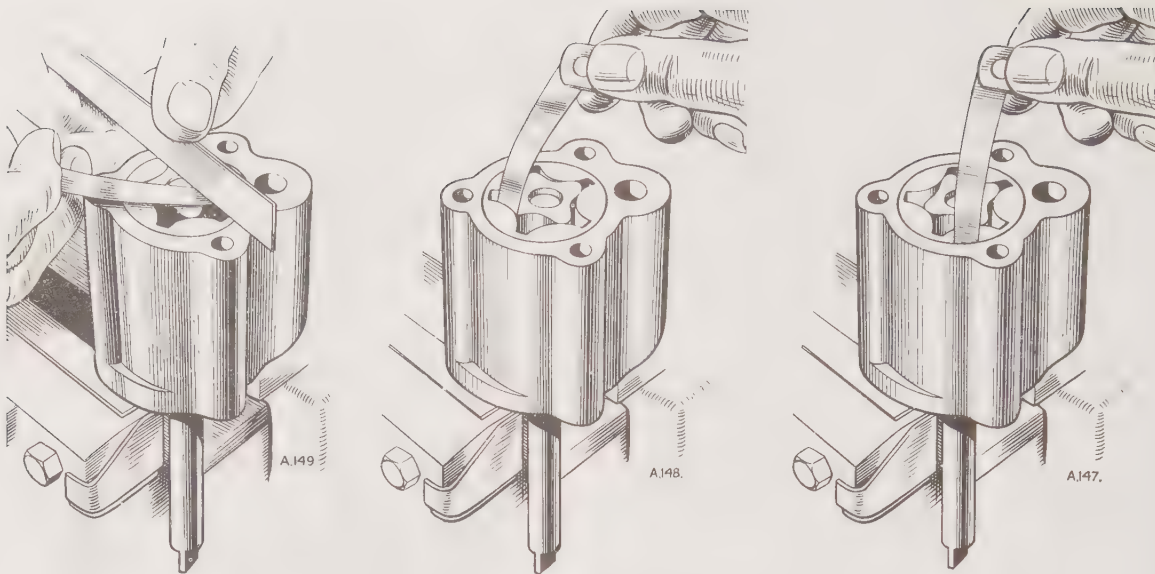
23 Method of measuring wear on oil-pump components, as described in text.
